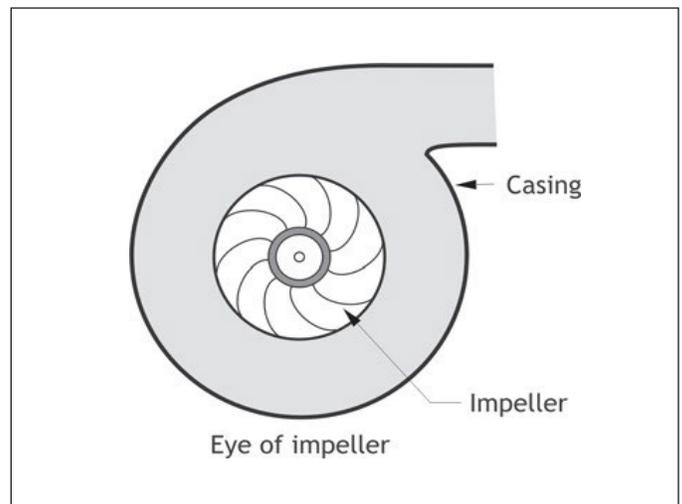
Centrifugal low head (single stage) pump (view from bottom).
